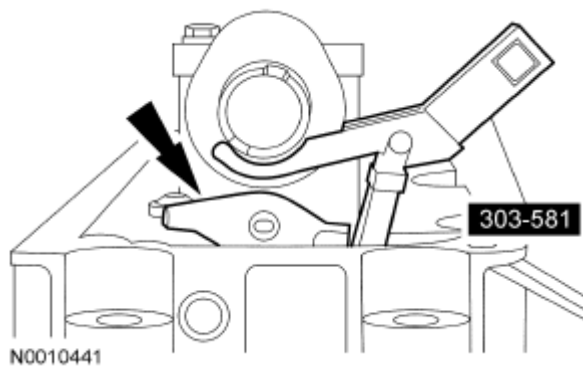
Locating Camshaft Roller Follower And Special Tools
